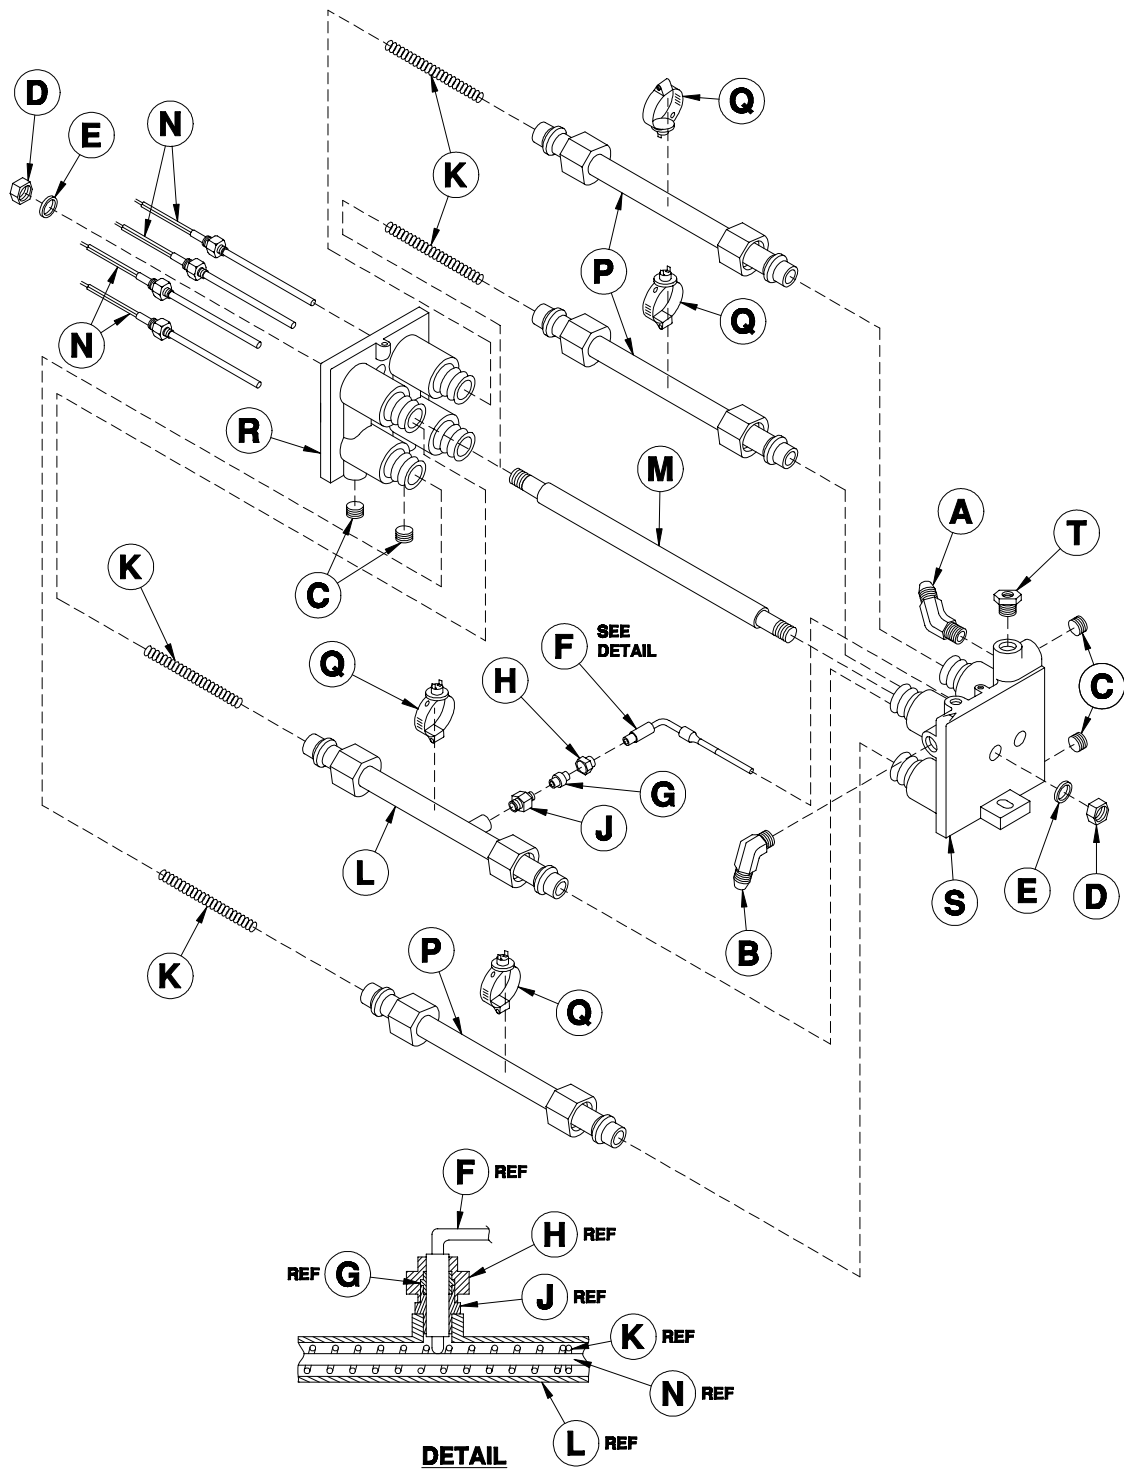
Primary Heater (Part No. 55310B and 55360B), Exploded View
